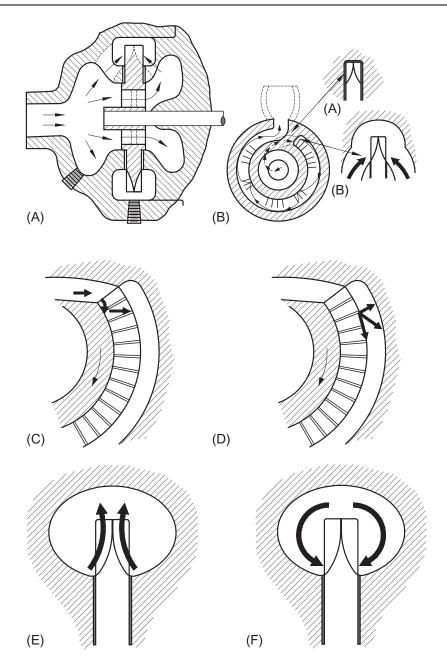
Several cross-sectional internal views of a regenerative turbine (disk friction) pump. (A) Liquids enters the pump and into the impeller wheel or disk (B). The liquid is carried by the friction of the rotating impeller (C) and (D). Close fitting plates (E) and (F) on each side of the the impeller prevent excessive internal leakage. Courtesy of Marcel Dekker, Pumps for chemical processing by J.T. McGuire, 1990.
